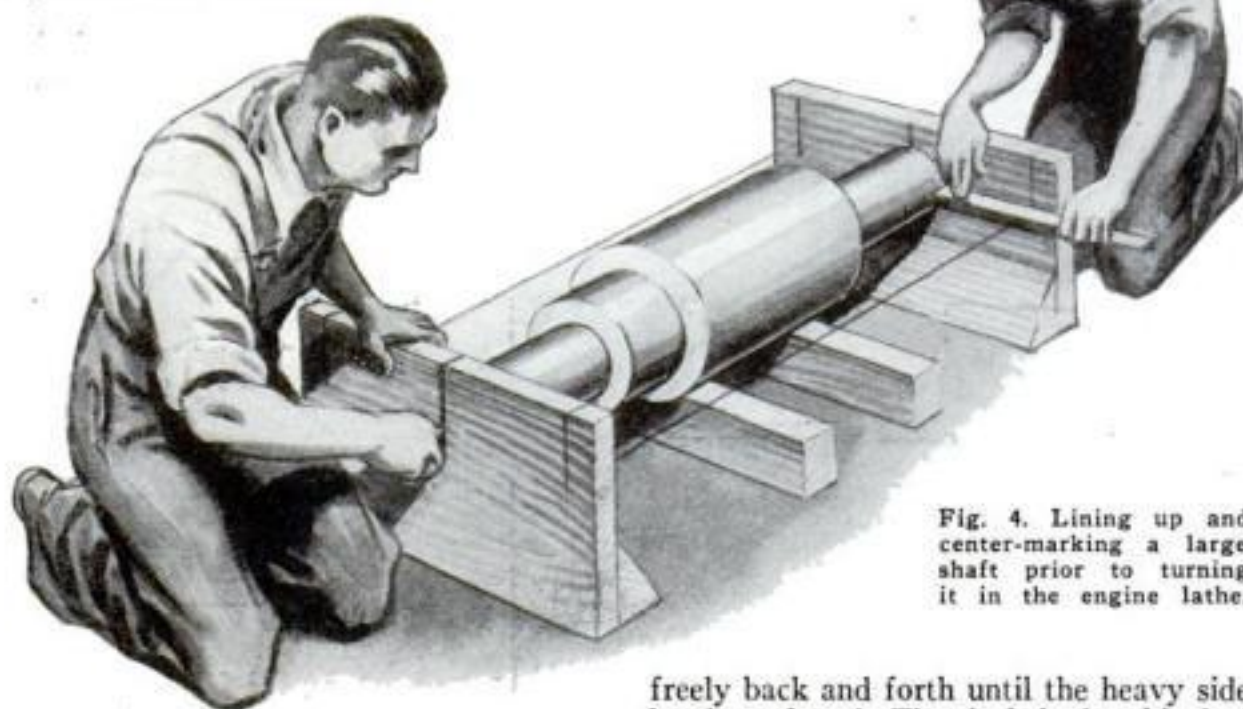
Lining up and center-marking a large shaft prior to turning it in the engine lathe.
